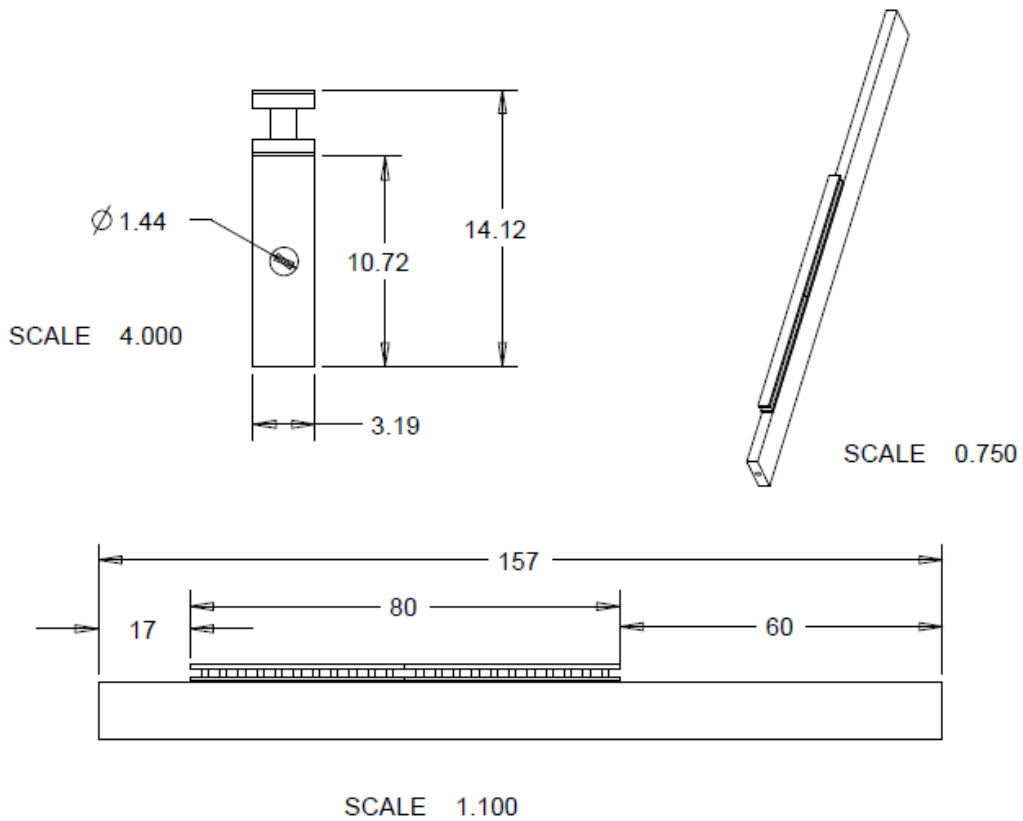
Engineering drawings of the simulated portion of the test section. All dimensions are in millimeters.
